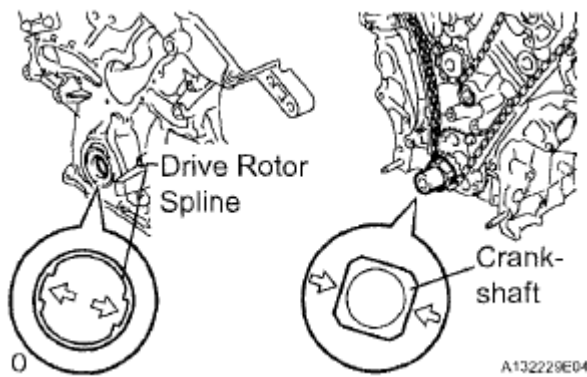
Identifying Drive Rotor Spline And Crankshaft
